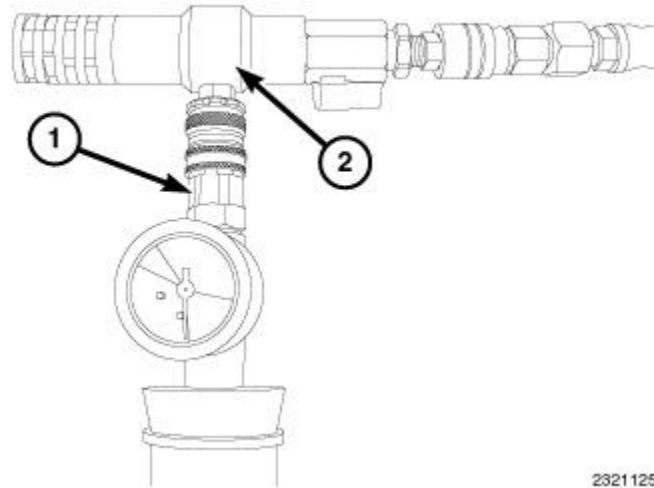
Vacuum Generator/Venturi & Cone/Vacuum Gauge Assembly
